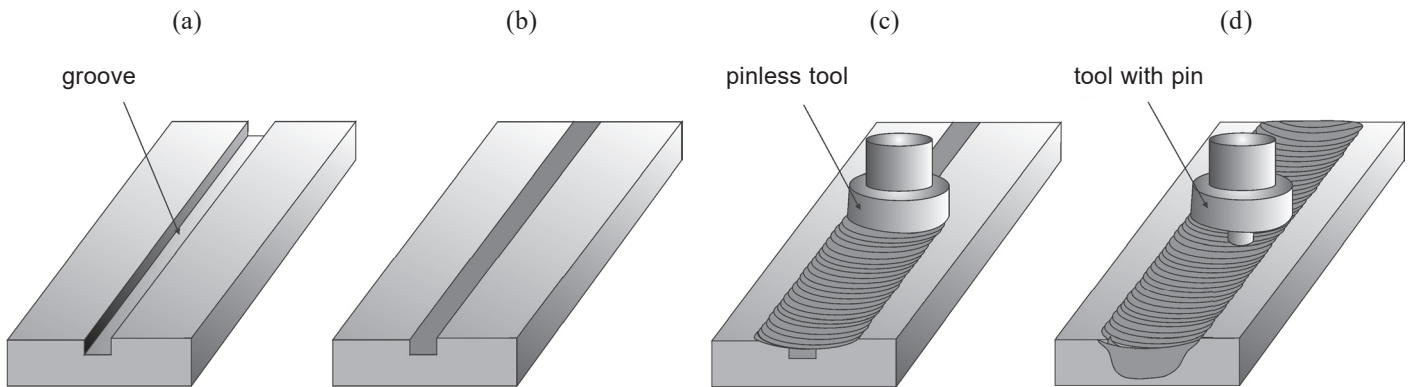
FSP groove technology: a) groove design, b) groove filled with modifying material, c) pre-friction processing by tool without pin, d) proper friction processing by tool with pin [12].
